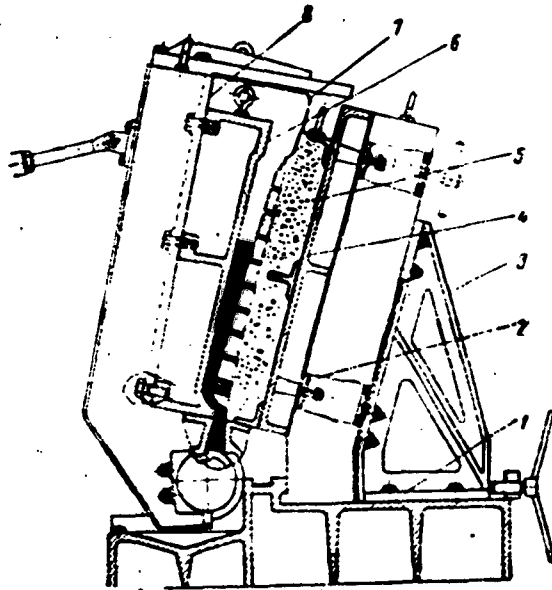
Cross section of a mold for "stripping casting"; 1. slab
